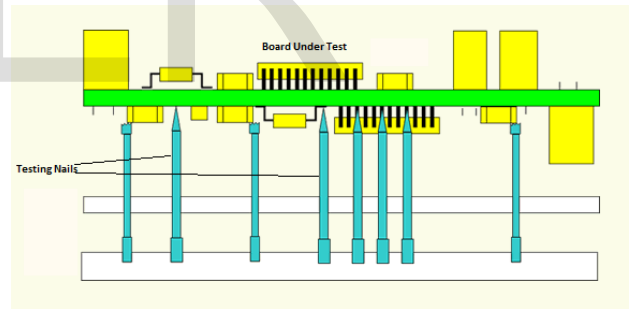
ICT System with a Pins Contacting PCB Under Test
